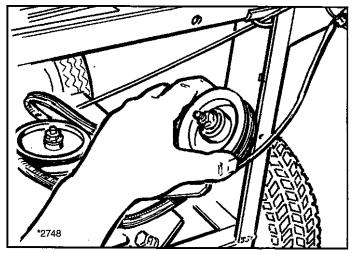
Pull Idler Pulley Assembly Back And Wrap Drive Belt Around Upper Idler Pulley
